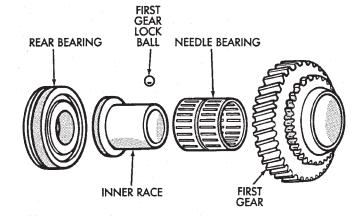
Install First Gear Bearing Inner Race Lock Ball
